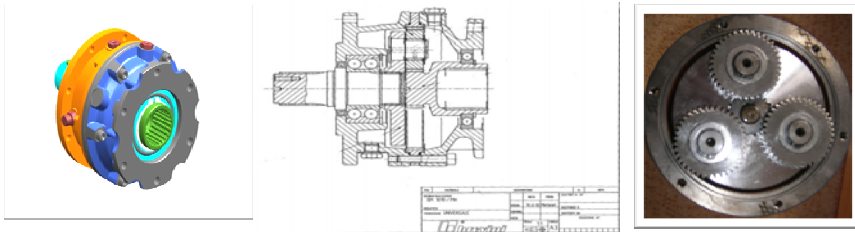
Planetary gearbox EM1010 “Brevini” – Italy
